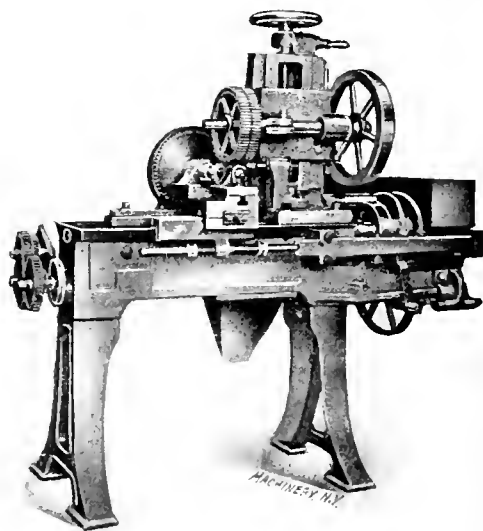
The Wilkinson Automatic Machine for Small Gears.
